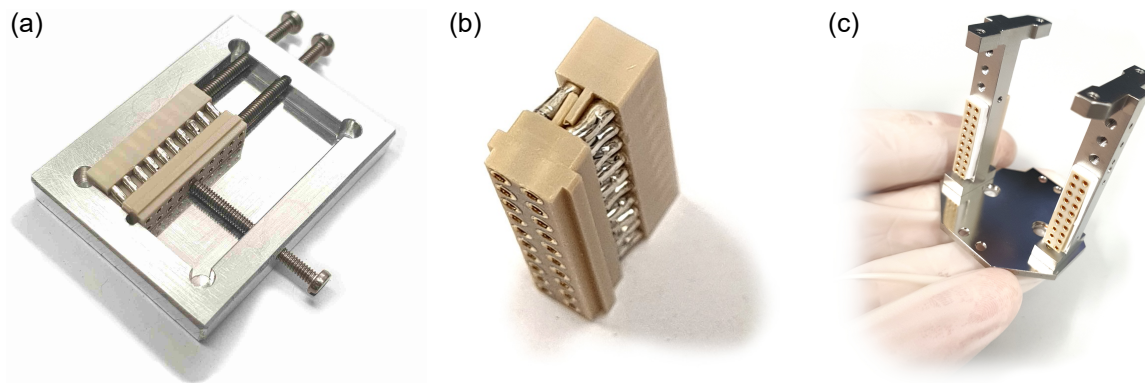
Assembly of the pin batteries. (a) PEEK pin battery (4e) after soldering inside the assembly tool. (b) Top view of the pin battery after soldering. (c) Pin batteries mounted in the titanium frame structure (4) with my hand for scale.
